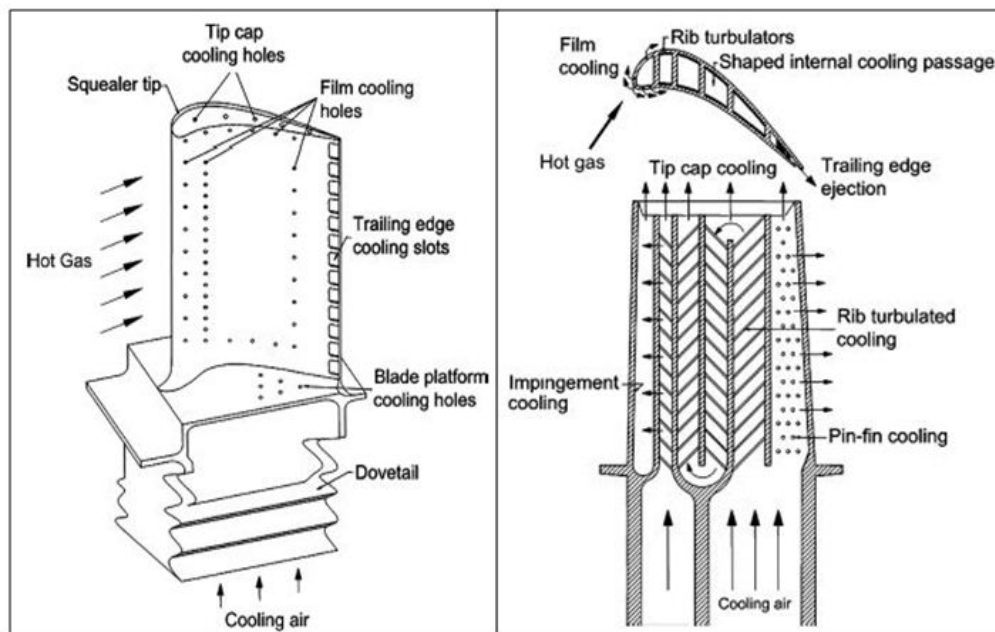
Schematic of a modern gas turbine blade with common cooling techniques (reproduced from [3])
